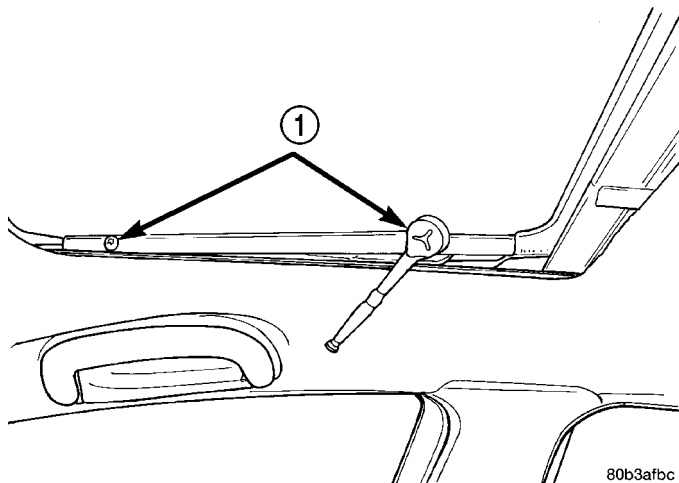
SUNROOF GLASS PANEL REMOVAL
